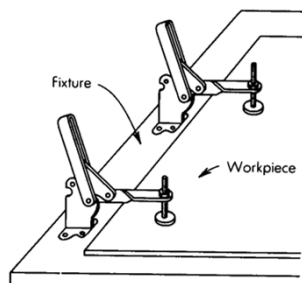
Typical clamp installation with the fixture supporting the workpiece directly beneath the clamps.
